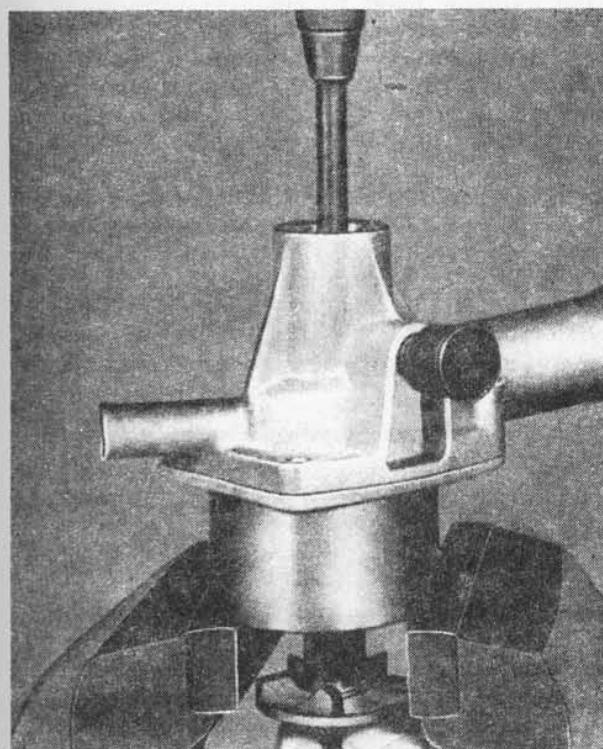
/2 - Driving Out Pump Shaft Using MP 1-121 Drift
